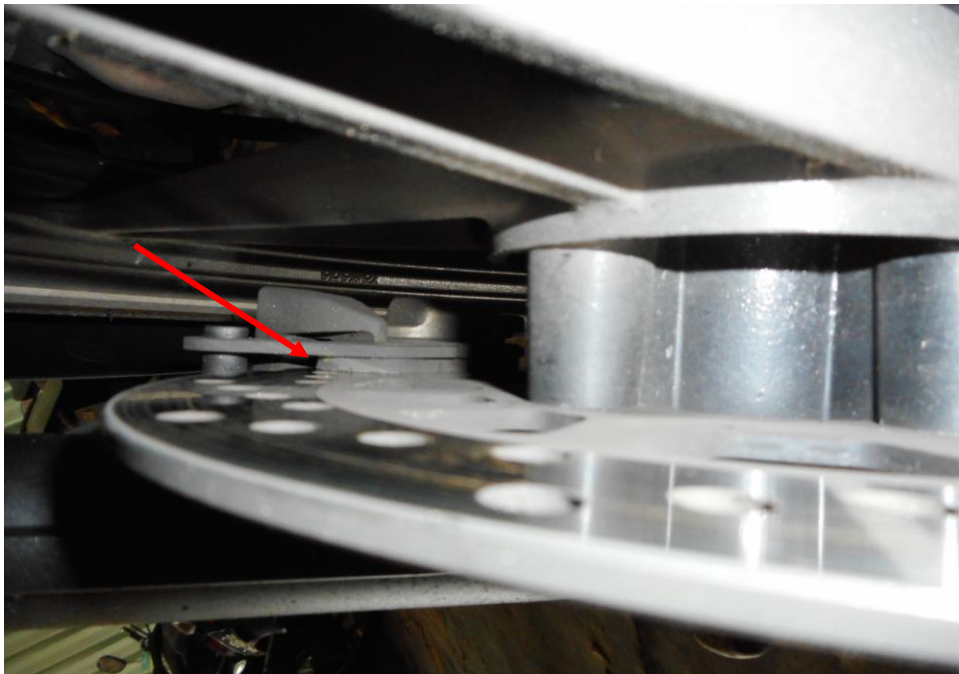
shows a close-up view our checks on the brake pad (front). The frictional material was observed to be in a sufficient level for operational purposes.
